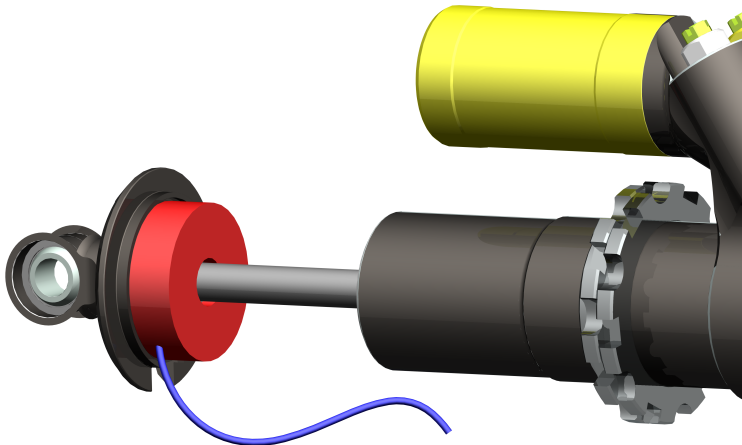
pos2. Red=EMAT, blue=cable. Sensor size: outer diameter=32.6 mm, inner diameter=10 mm (1 mm liftoff), thickness=10 mm.
